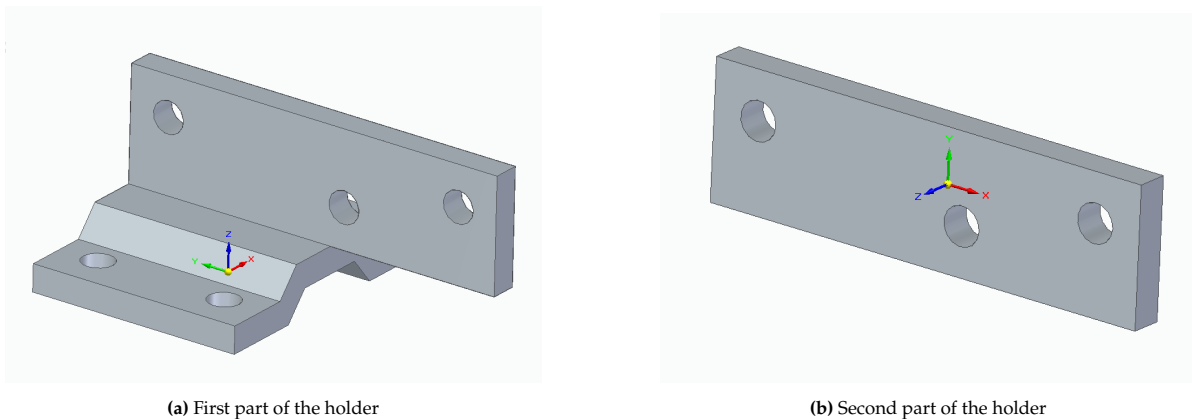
New designed MS5837-30BA and thermocouple holder. The first part would be screwed into the inlet fluidic interface of the thruster assembly, and the second part would be screwed on the first part.
